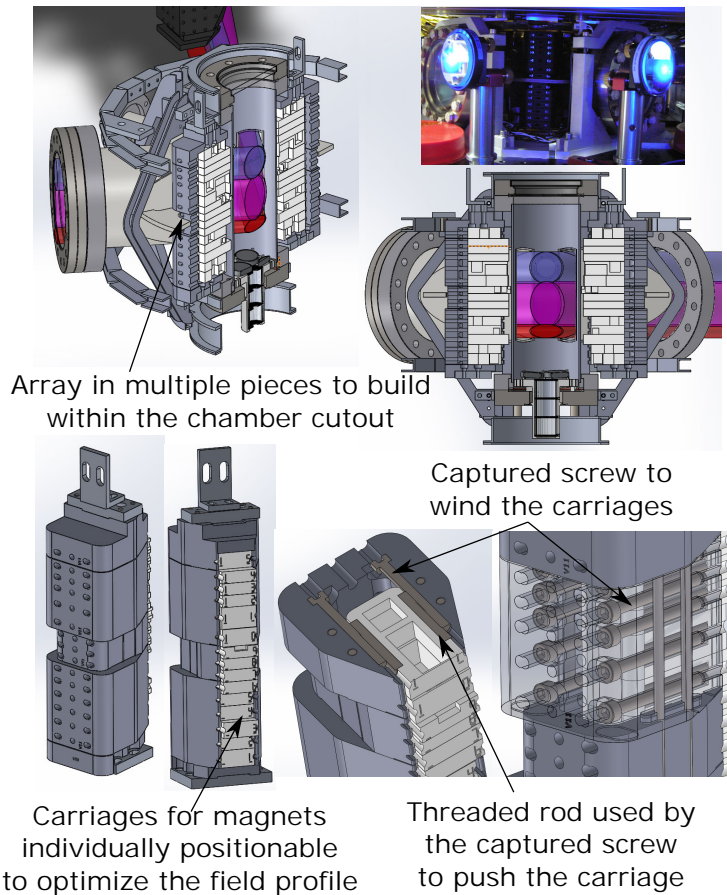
Magnet array design and construction. Here we show the design of the 3D printed holders for the magnet arrays including the precision screw adjustment provided by inserting pieces of threaded rod within the structure. The array also had to be disassembled and reassembled on site to accommodate the vacuum chamber support wedges.
